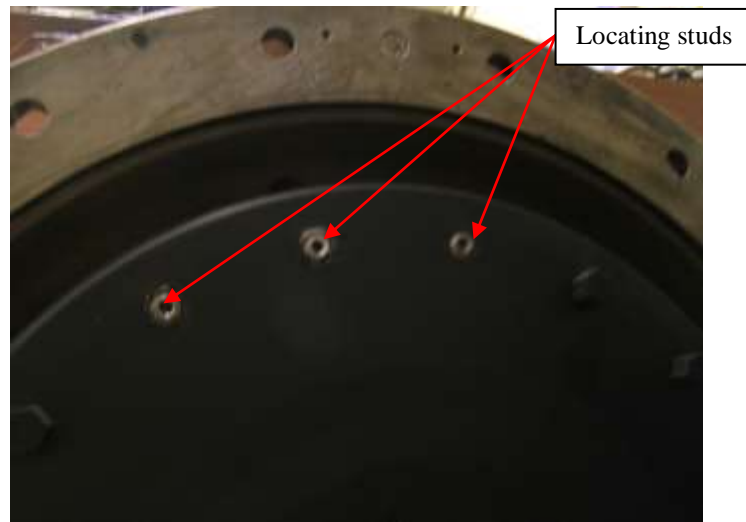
Picture showing locating studs used for attaching bolt heads to the rotor.
